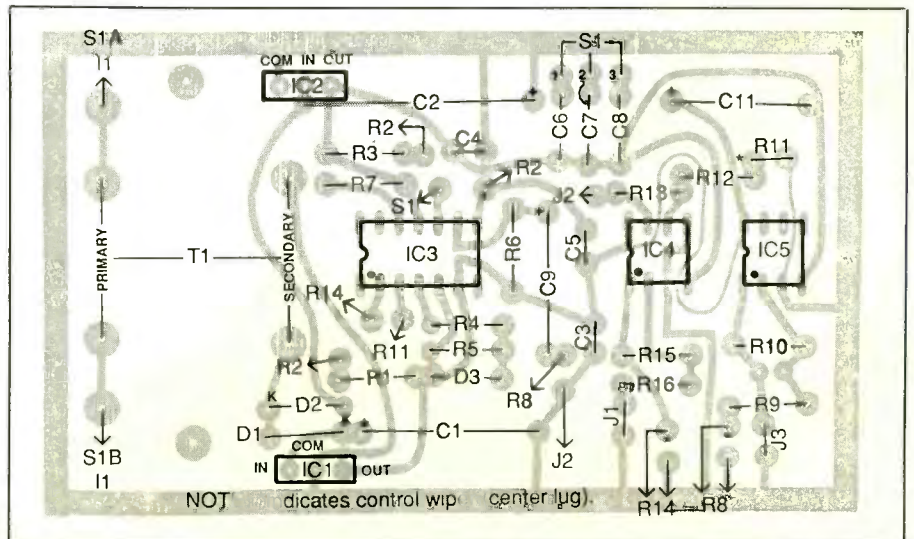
Wiring diagram for pc board and layout for perforated-board.
